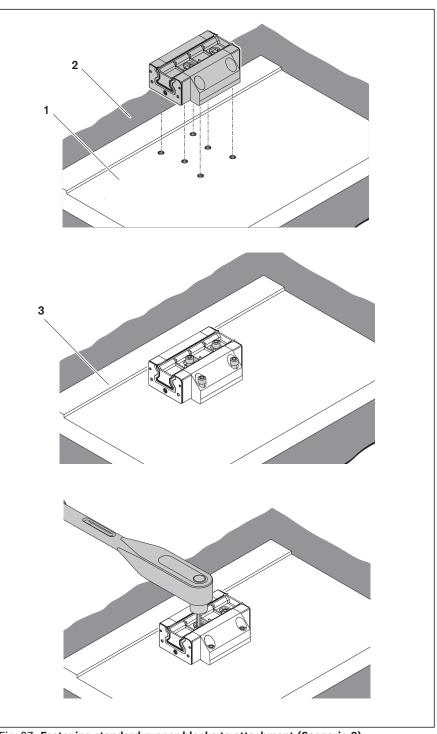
Fastening standard runner blocks to attachment (Scenario 2)
